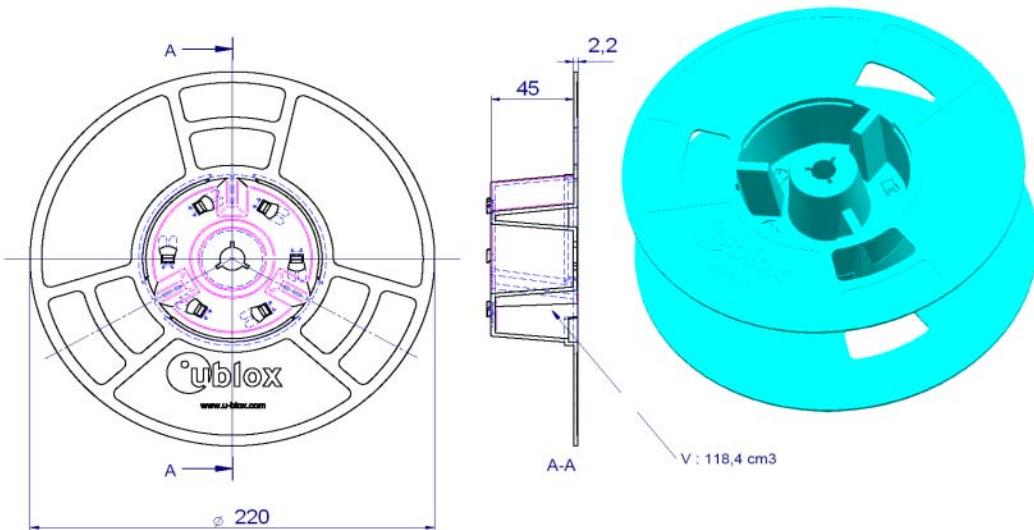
Dimension of reel for 100 or 250 pieces (dimensions unless otherwise specified in mm)
